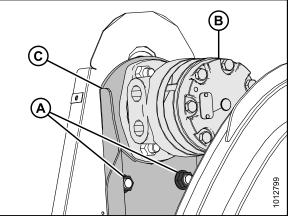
Single-Reel Drive Shown – Double-Reel Drive Similar
